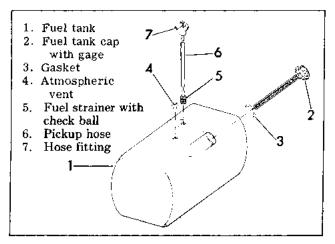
F-38. Polyethylene Fuel Tank and Fittings
